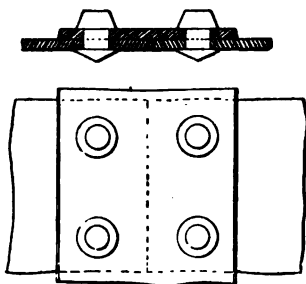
SINGLE RIVETED SINGLE STRAP.
